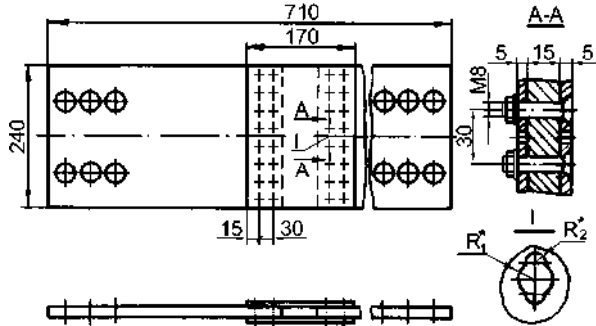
Double-shear bolted joint specimen with initial failure
